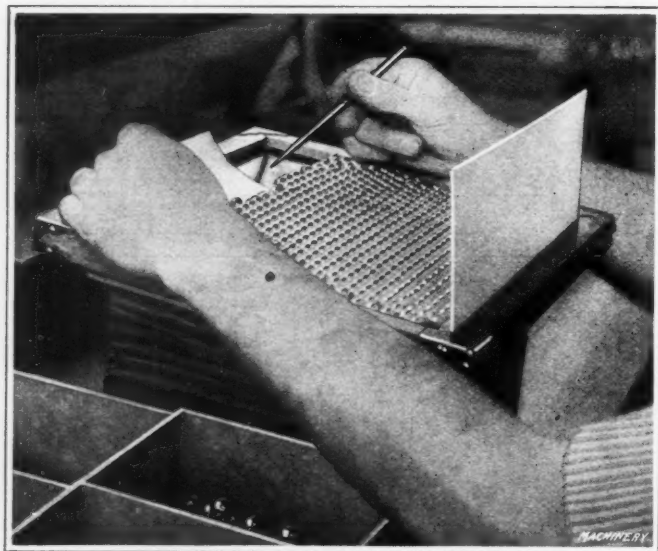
Type of Glass Plate on which Preliminary Inspection is conducted
